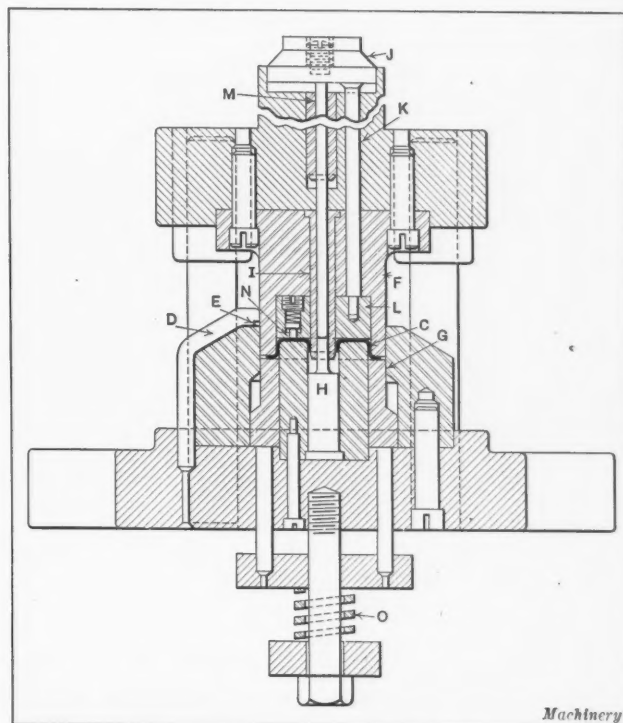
Die used in blanking, forming and piercing Flanges *C* shown in Fig. 1
